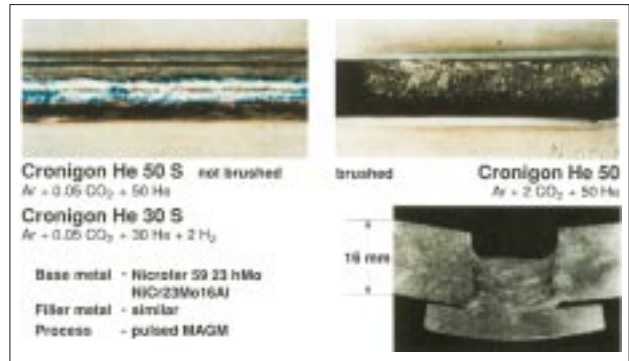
MAG welding of nickel base alloys Effect of type of shielding gas
